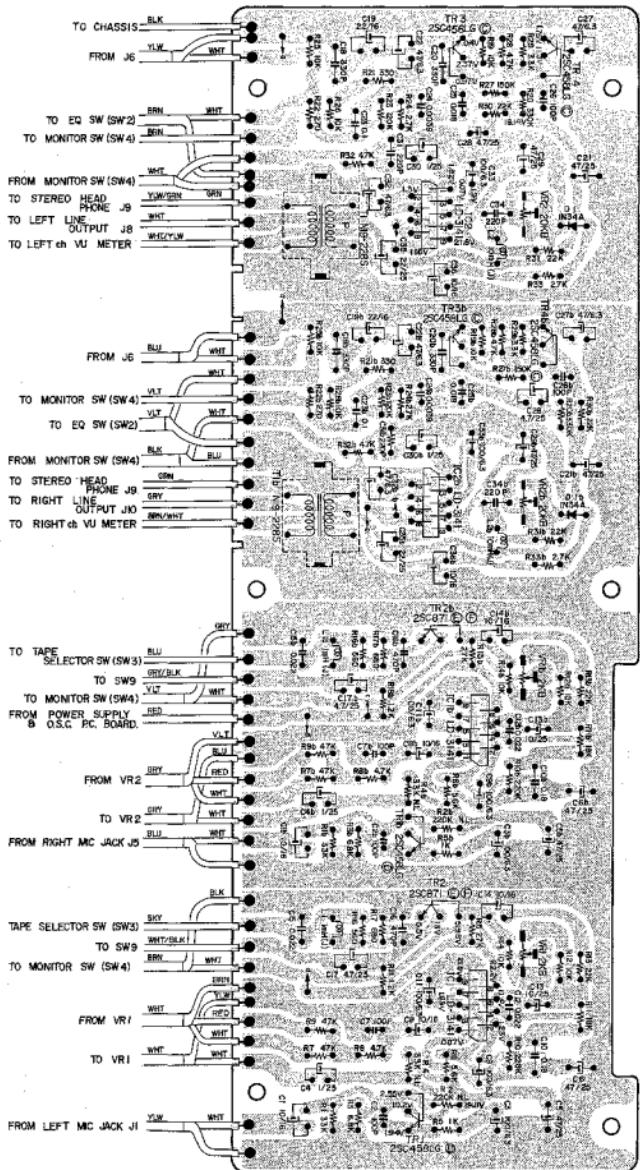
PRE-AMP. P.C. BOARD (LE-5022)
